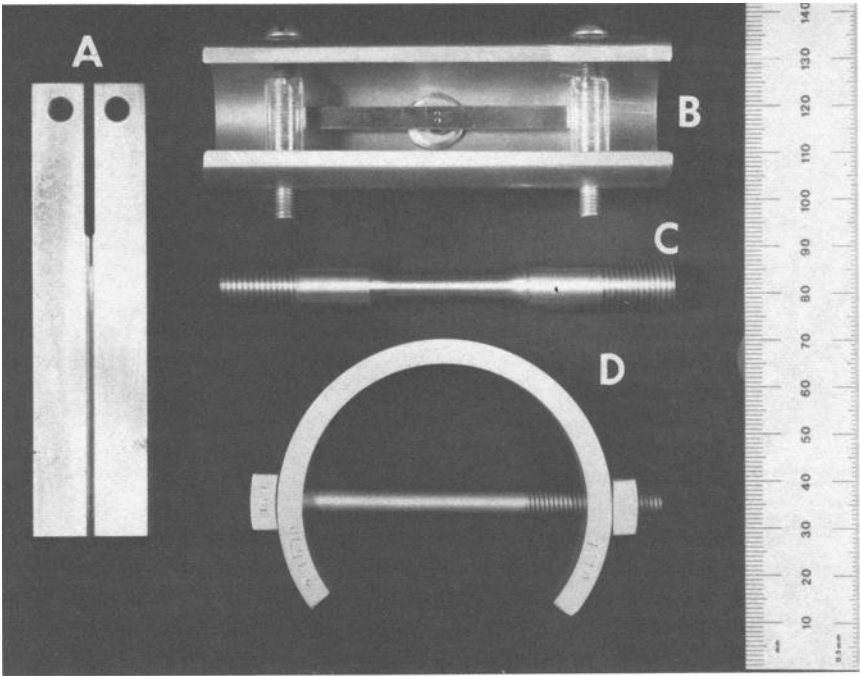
Specimen types for sour gas cracking evaluations include: (A) DCB, (B) bent-beam, (C) TM-01-77 tensile, and (D) C-ring.
